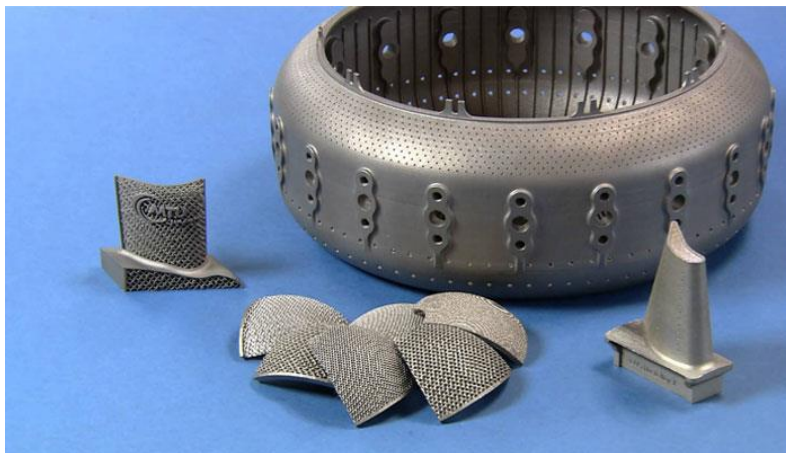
Additively manufactured parts made by MTU Aero Engines company [19]
